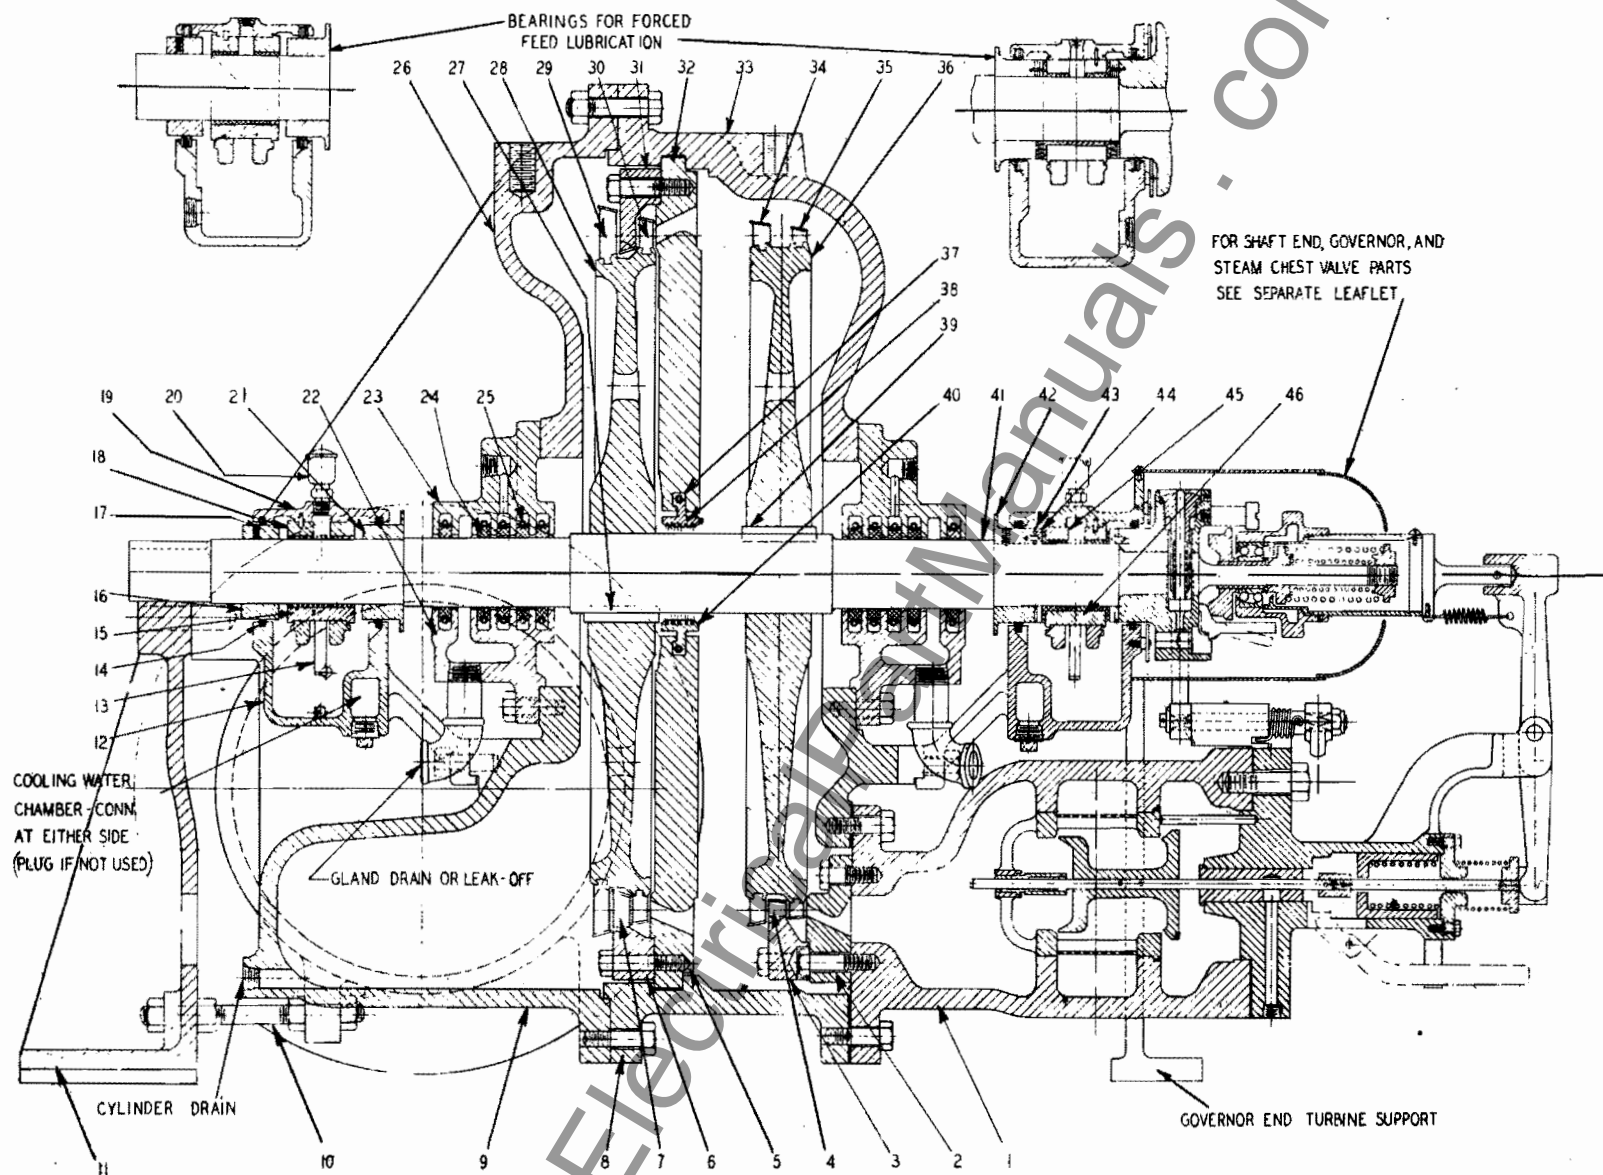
Longitudinal Section, Type C-225 Turbine
